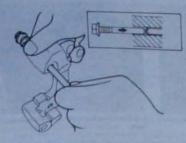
Removing the guide pin bushes from the caliper pre-September 1985 models (Sec 9)
